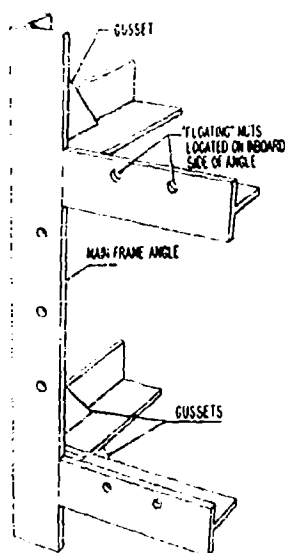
Frame construction showing clearance holes for drawer or chassis front-panel thumbscrews
